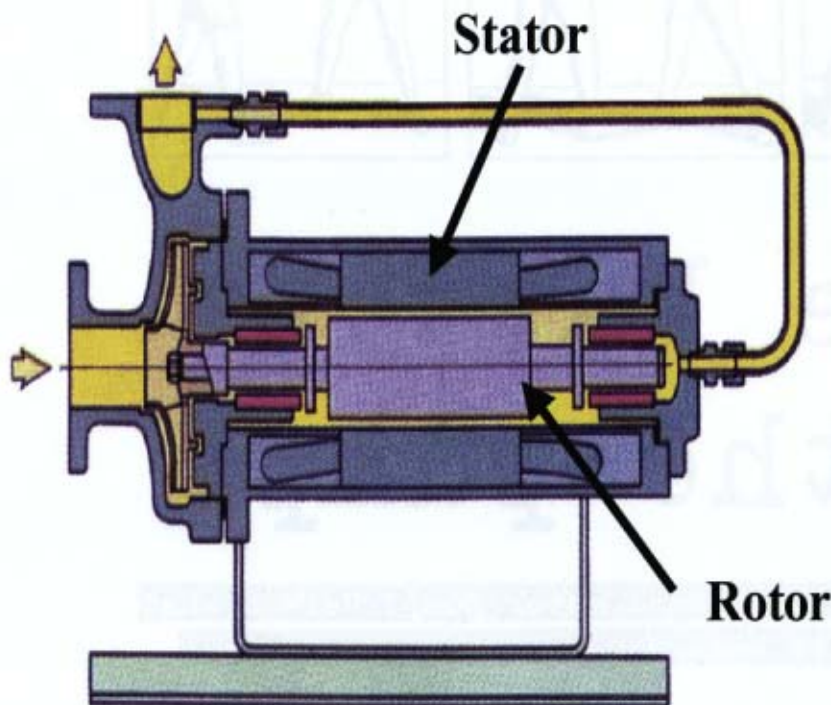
With a canned motor pump, the driven rotor (inner rotor) is directly connected to the pump impeller, which effectively unitizes the pump and driver (motor). The electric motor is encapsulated in a can that isolates the rotor and process liquid from the stator.
